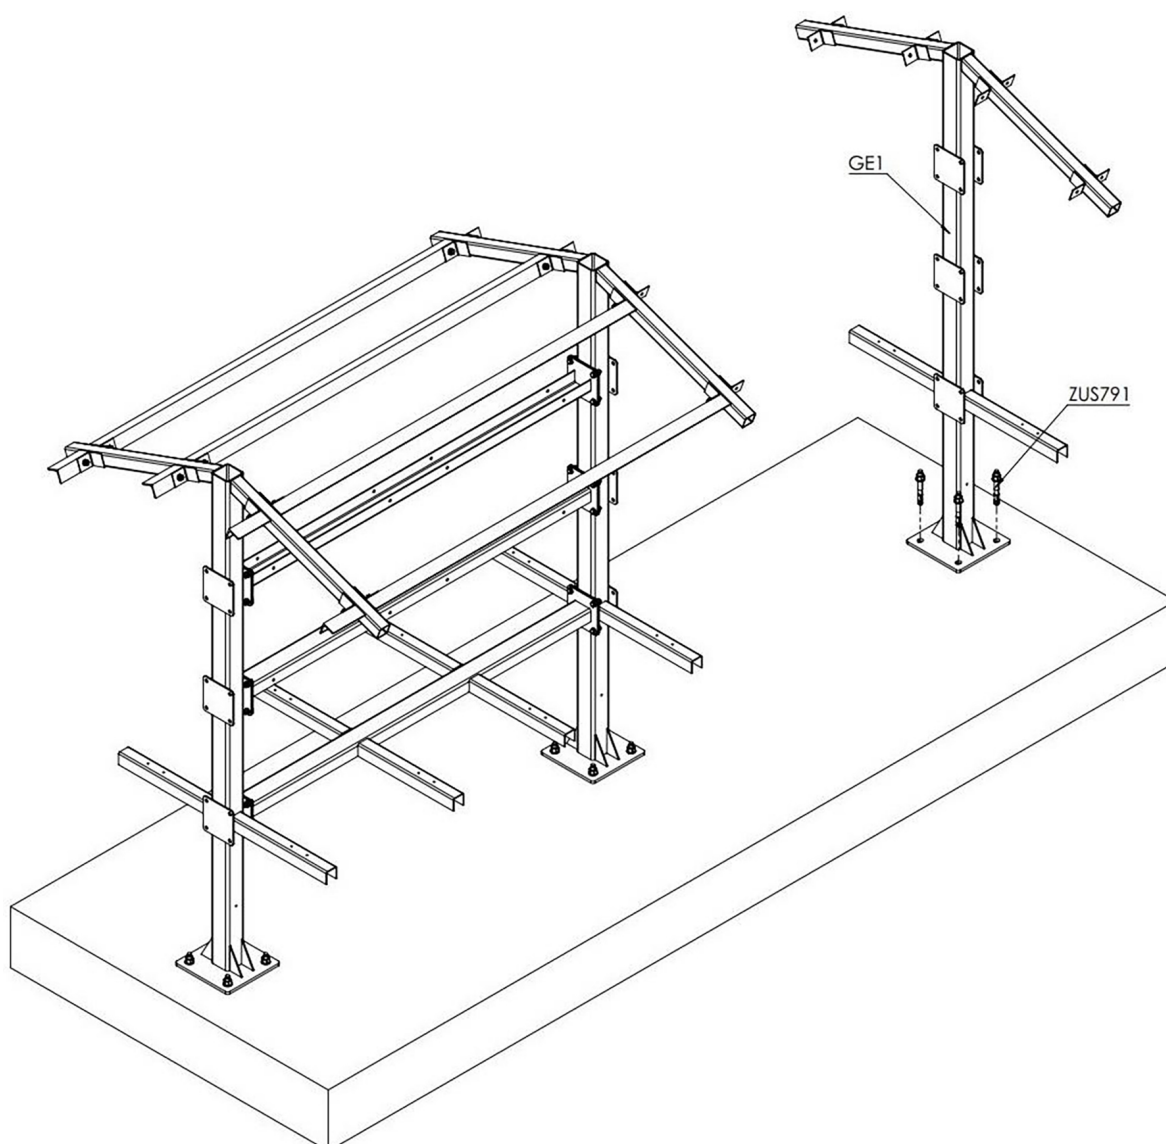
Assembly — Inverter rack — Third GE1 (detailed view)
